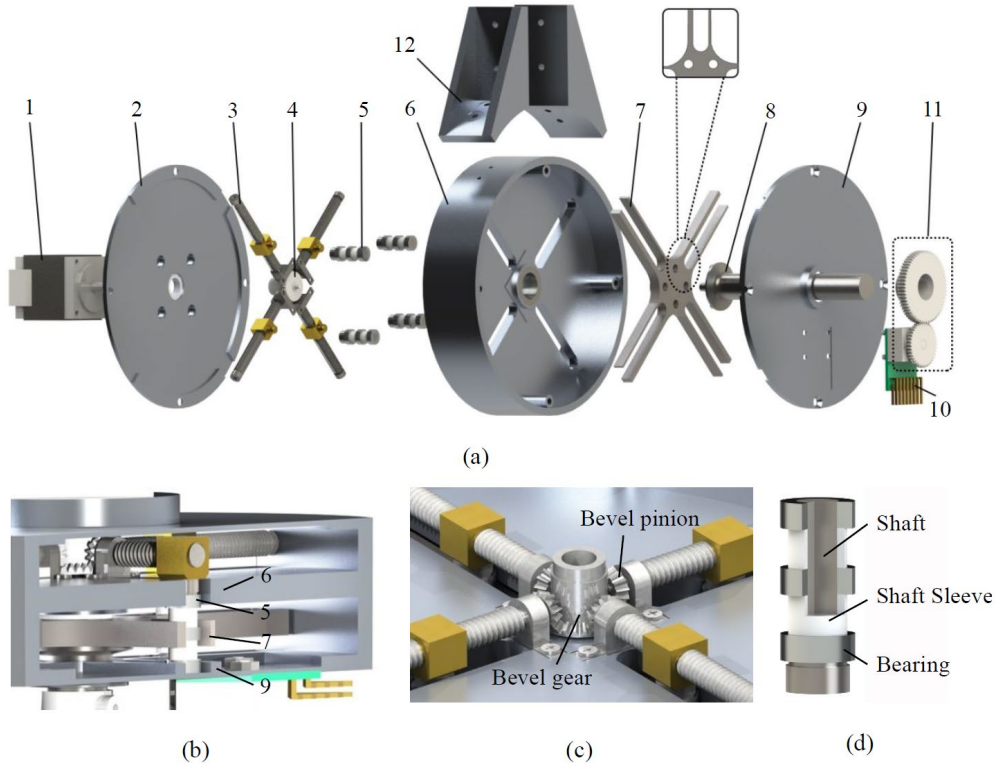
The structure of our prototype: (a) Exploded view; (b) Roller components which are rigidly attached on the sliders, move along straight grooves as leadscrews are actuated. Inside the VSA, load is transmitted from spring via roller components to the walls of straight grooves which is part of the output frame. (c) Each leadscrew is rigidly connected to a bevel pinion, and driven by a bevel gear. (d) Roller components (including bearings, a shaft, and shaft sleeves for locating bearings).
